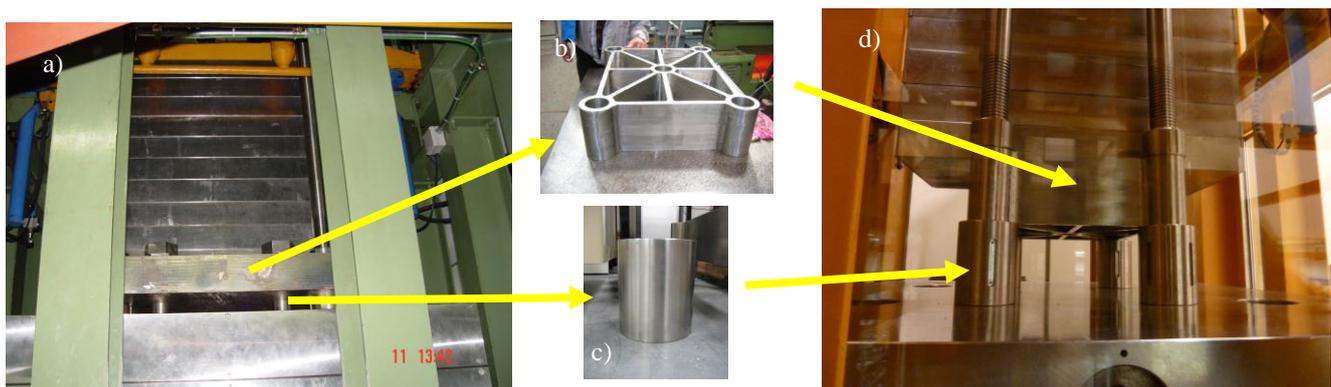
Modification of the loading frame (lower platen), a) before modification, b) modified lower platen, c) loading frame support, d) after modification
